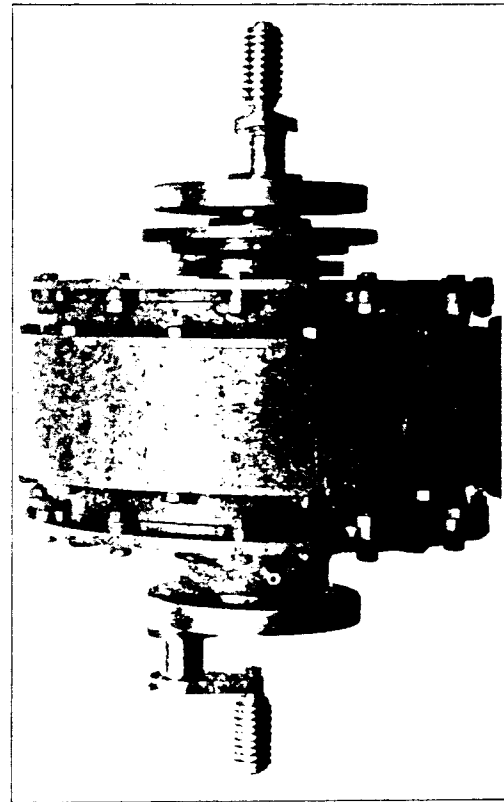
OUTSIDE VIEW OF ELECTRIC MOTOR.
